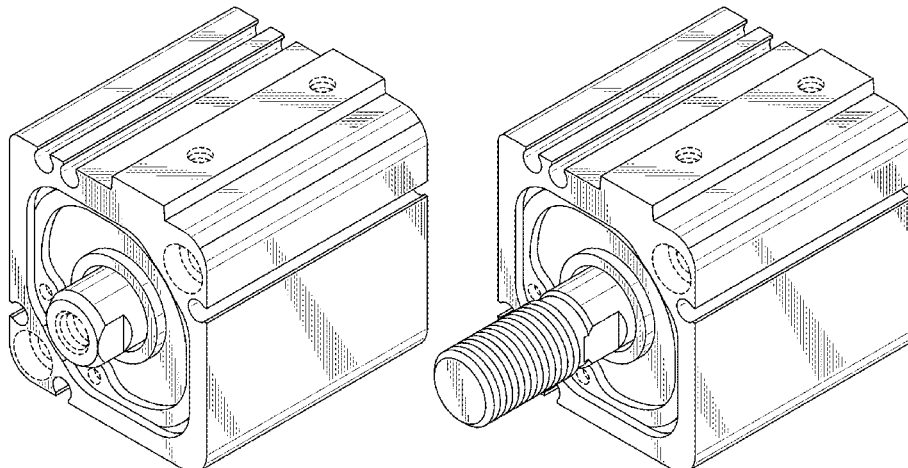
is a front, top and left side perspective view of a fluid pressure cylinder showing a third embodiment of our new design;
